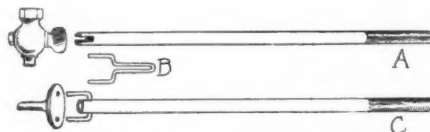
Ford combination tool, showing at A its use as a pet-cock wrench and at C as a valve grinder using attachment B
